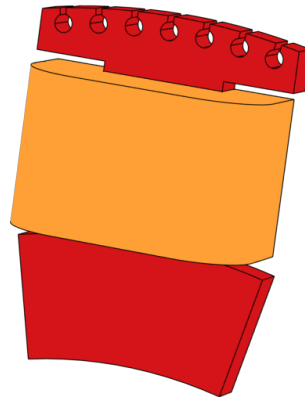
The VSM rotor model with rotor iron in red and field winding in orange color.
